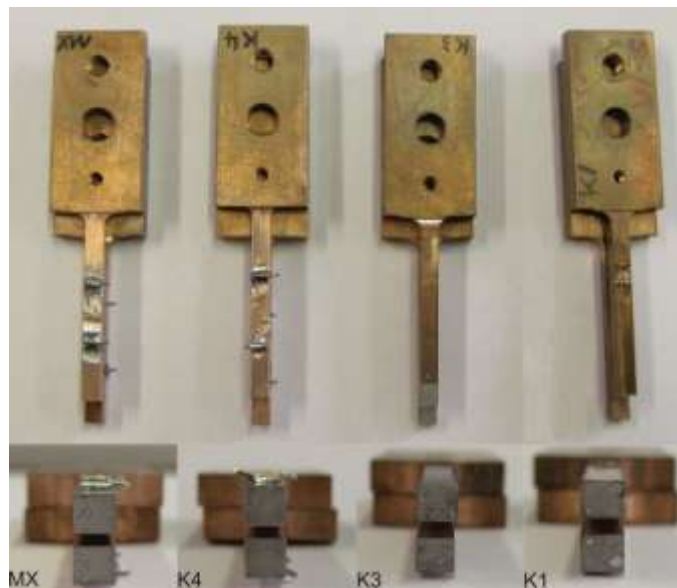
Butt-splice samples K1, K3, K4 and MX, with details of the fractured solder connections (due to tensile strength measurements,).
